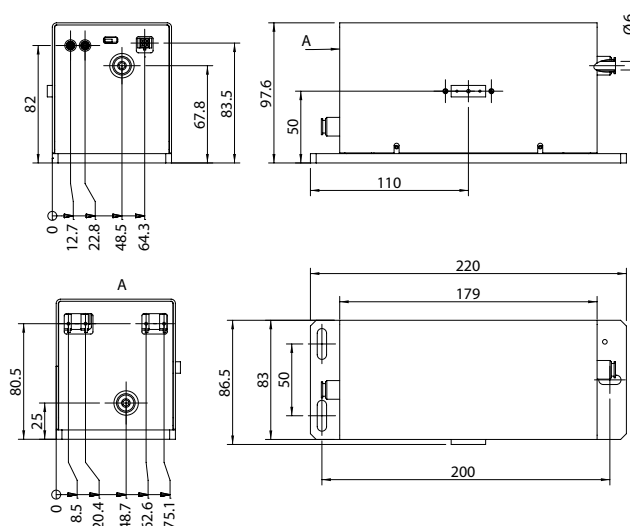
Outline drawing of encased version 2DPB3/DPB3 series Pockels cell driver
